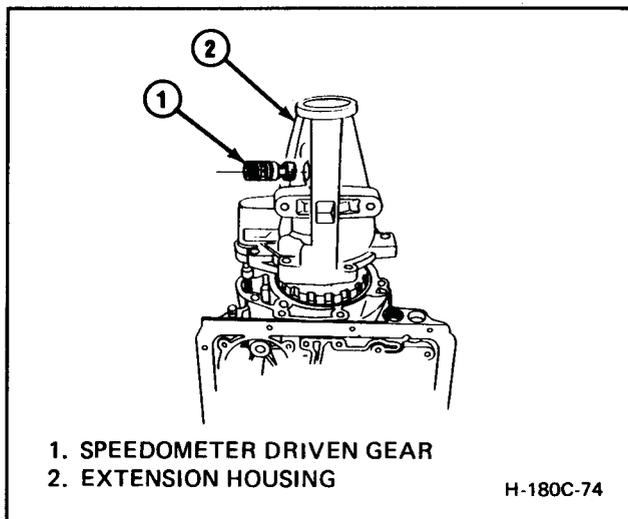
C-76 Extension Housing and Speedometer Driven Gear
